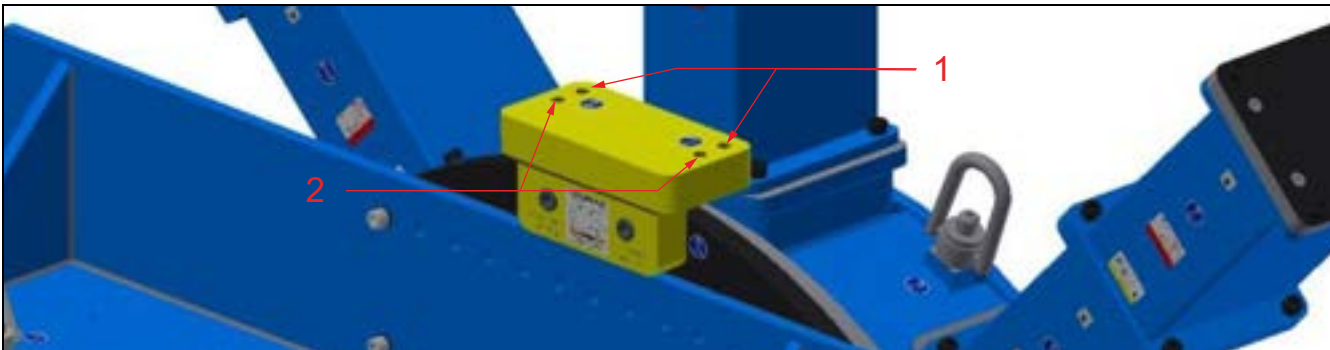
LIFTING ASSEMBLY ON MACHINE
